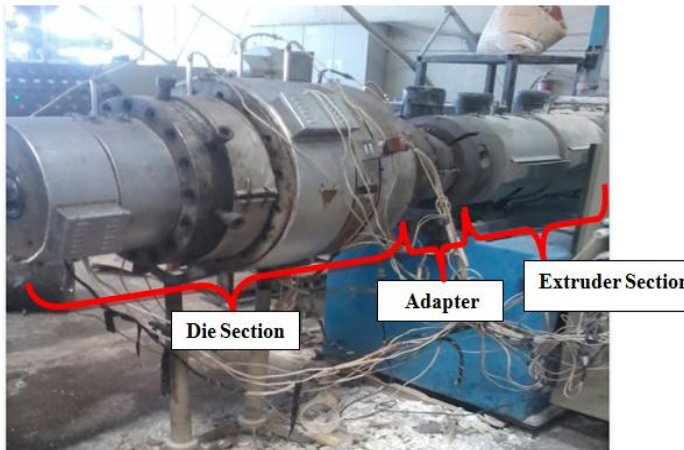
APF Extrusion machine components - Die Heater, Adapter and Extrusion Section
